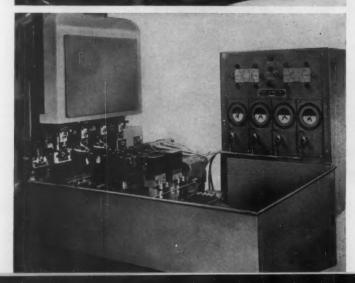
(Top) Velvetrace milling machine operates without mechanical contact of the template
